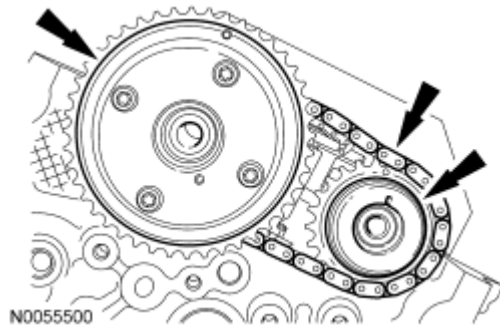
Positioning LH Secondary Timing Assembly Onto Camshafts
